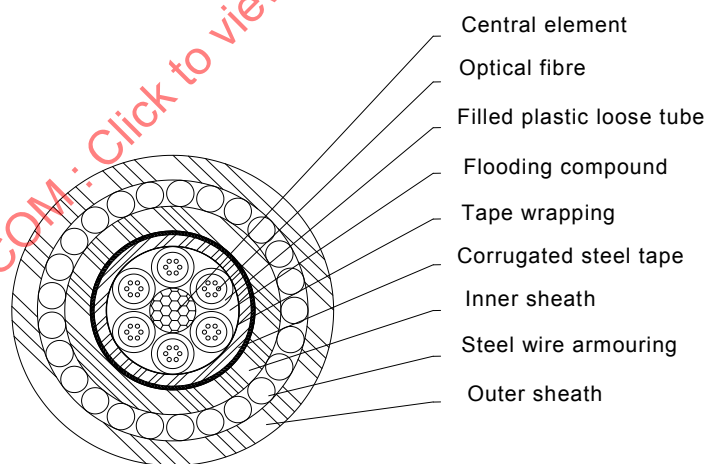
Optical fibre sewer cable for laying – corrugated steel
